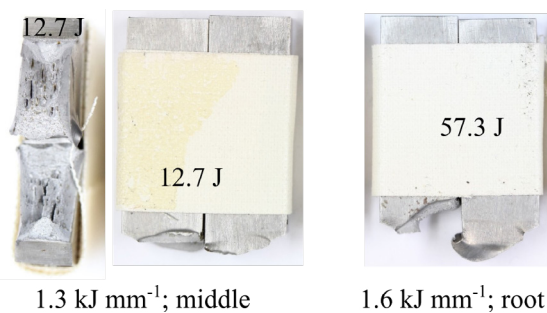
Tested Charpy impact test specimens: brittle fracture (left) with cracks and brittle-ductile mixed fracture (right).
